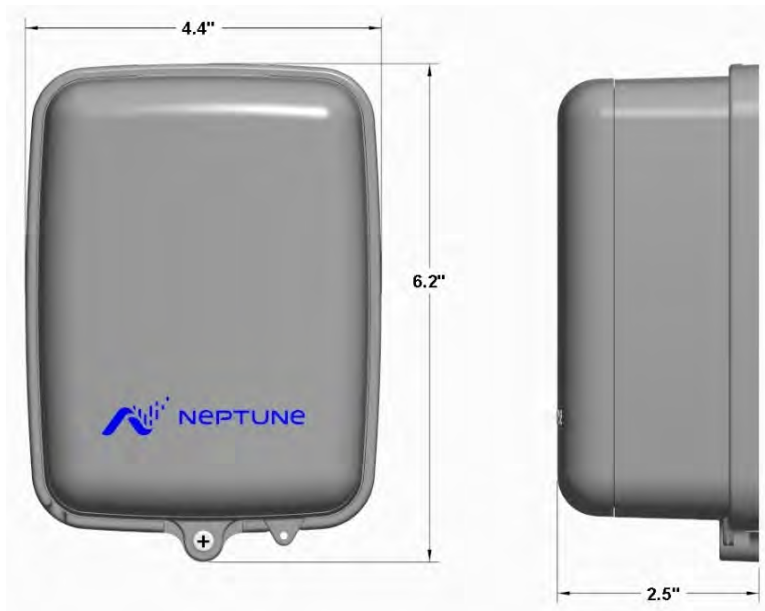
Cellular Endpoint – Dimensions Front and Side
